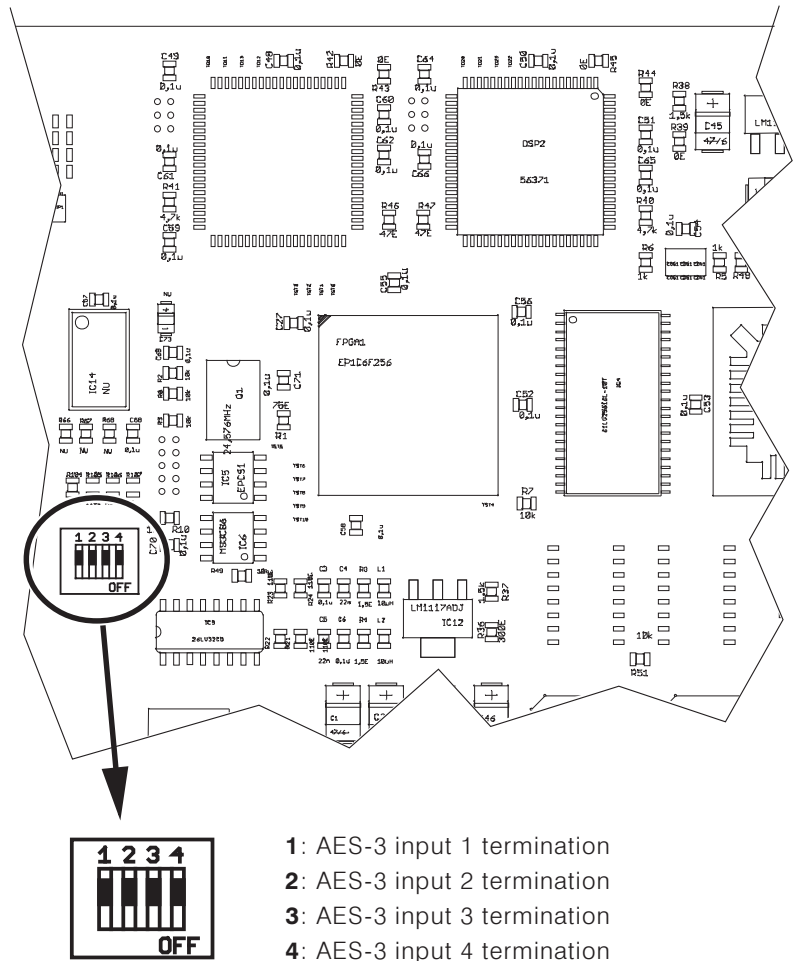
Partial view of the main pcb with the DIP switch
